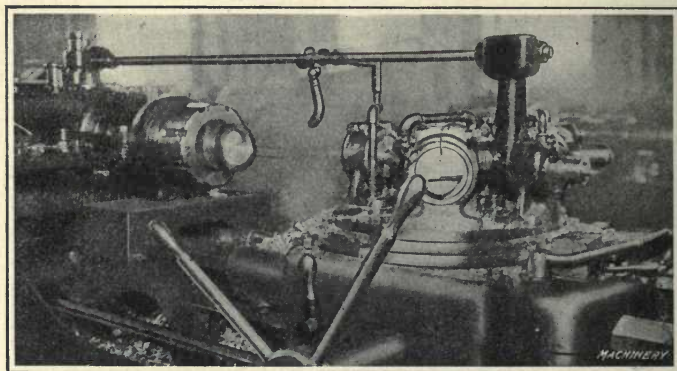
Boring out Closed End of Shell for Gas Plug and threading
